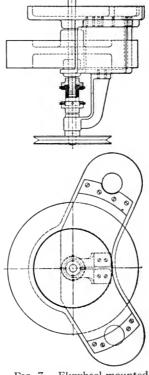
Flywheel mounted on shaft of gate sprocket in a continuous printer.
